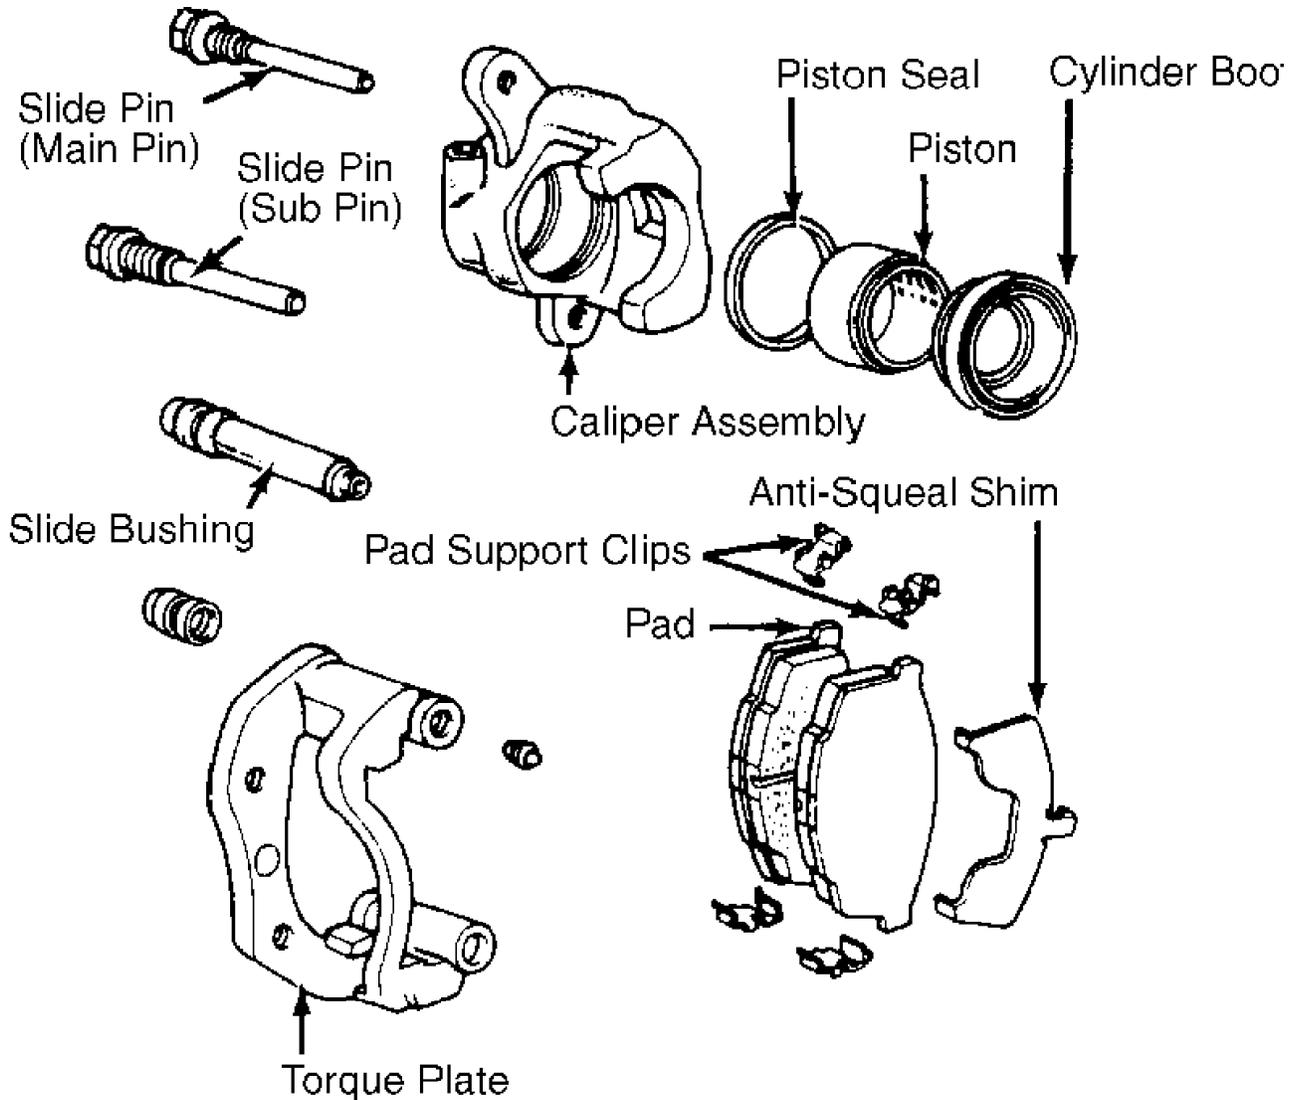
Corolla & Tercel Sliding Caliper Assembly
